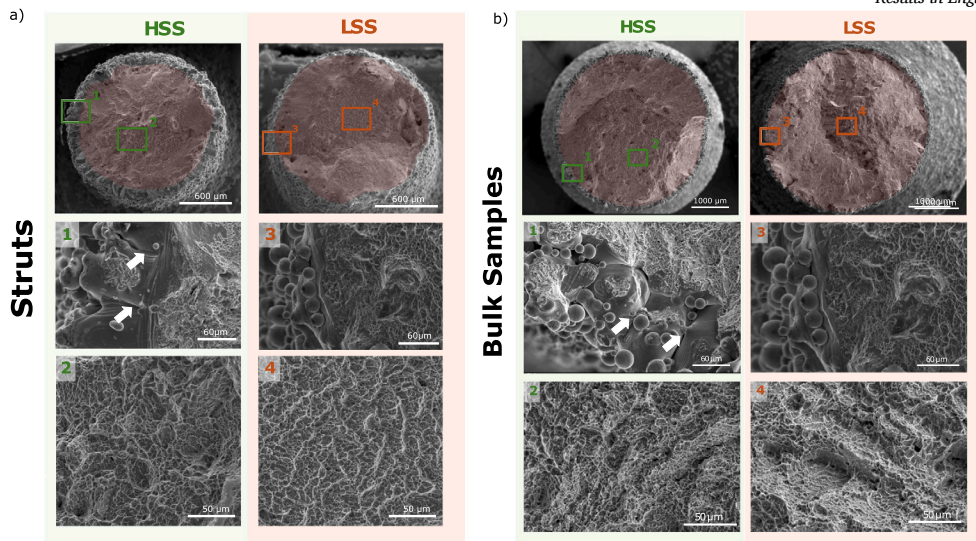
Fracture surface of the HSS and LSS 90° strut and bulk specimens. In red, the load-bearing areas affected by the fracture are highlighted. High-magnification details show the difference in surface roughness and fracture details between the LSS and HSS samples.
